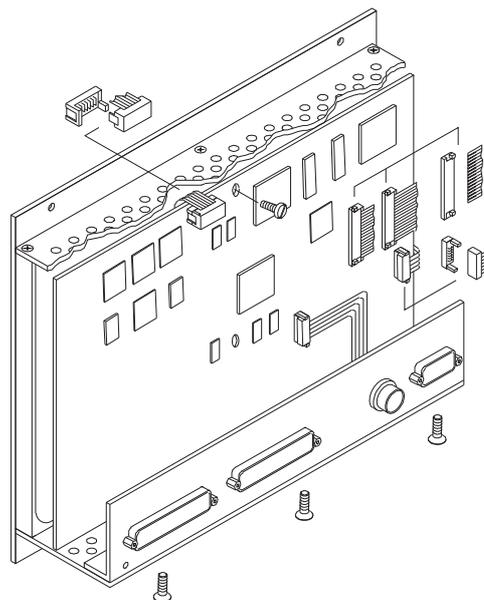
Fastening the mounting unit of main pcb and connector panel
